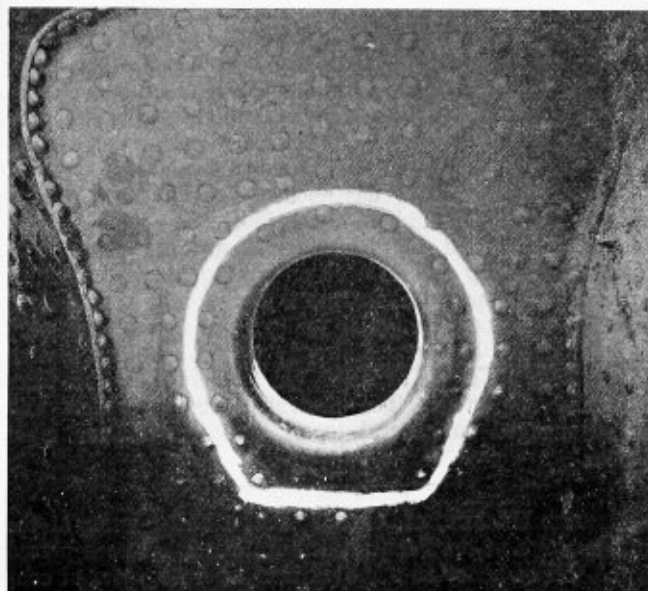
Door Collar Patch Welded on Boiler
